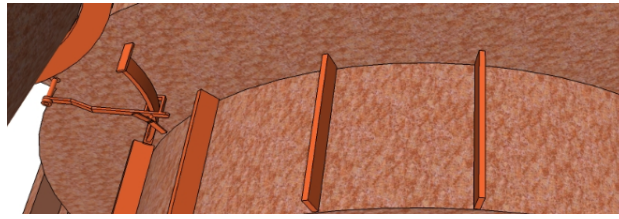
Lower knife damper position handle. Located under the pre-separator body.
